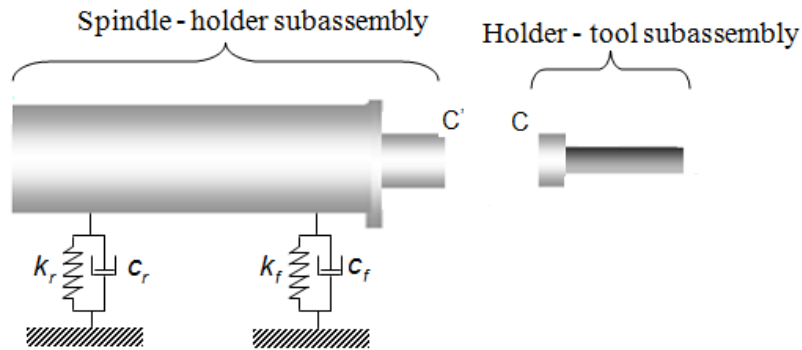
Rigid impedance coupling of the spindle - holder and holder – tool subassemblies.
